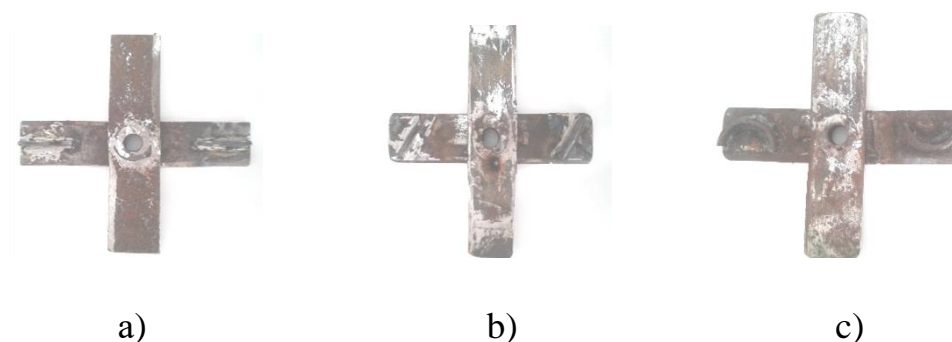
Designs of rotors with various hammers: a) straight hammers located along the rotor axis; b) hammers located at an angle of 45 degrees to the rotor axis; c) paraboloid hammers.
